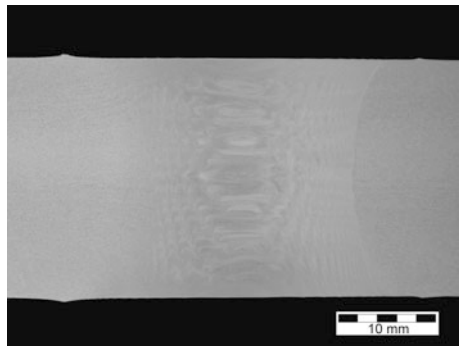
Macrograph taken from a supported bobbin weld in 25 mm thickness AA5083-O using a 16 mm diameter probe. 'Reproduced courtesy of TWI Ltd'
